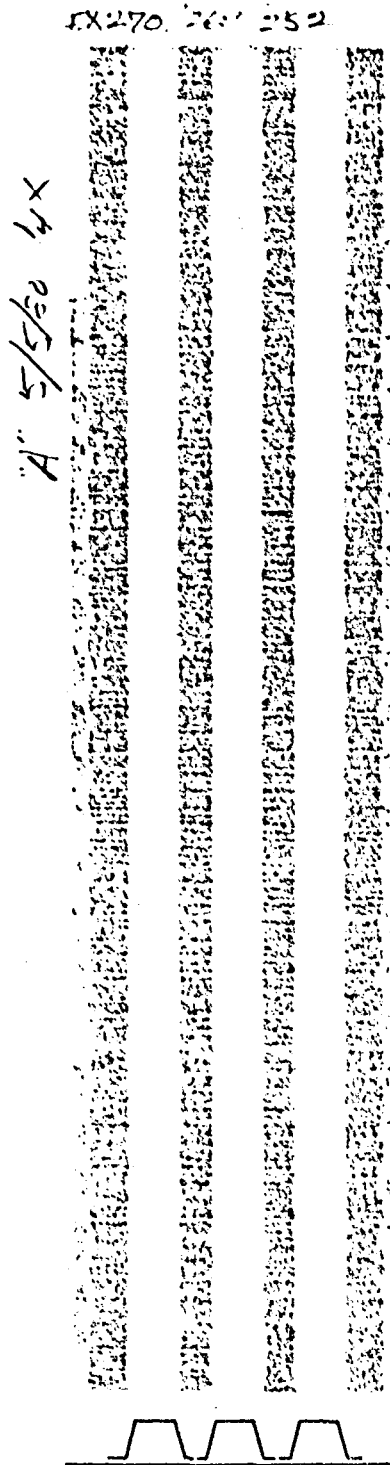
C-Scan of Stringer to Skin Bond Joints, Panel EX270/278/277
